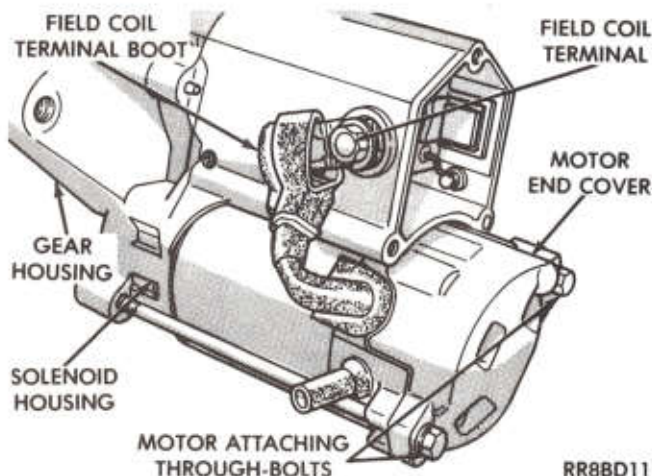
Remove or Install Field Terminal and Through-Bolts
